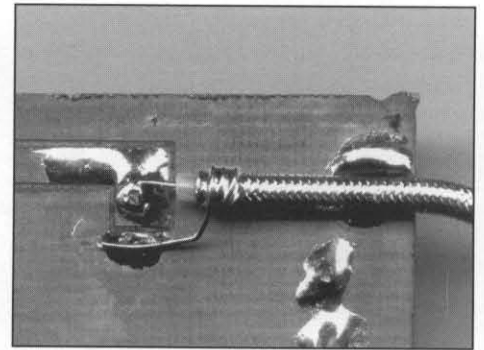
Thanks to the teflon dielectric, the 1671A can be soldered directly to a PCB ground plane (right) with impunity.
